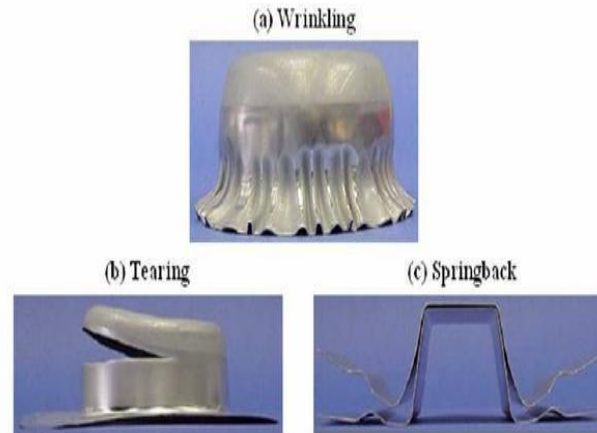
Diagram Showing defects in Sheet Metal Bending.
